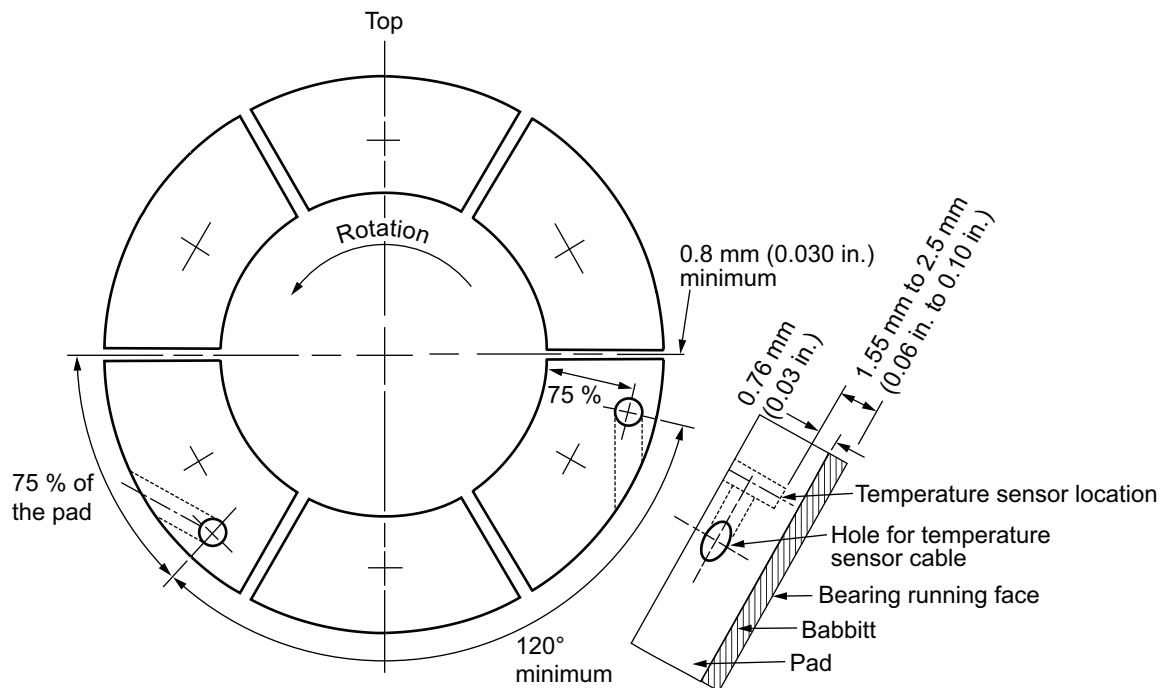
Typical Installation of Thrust Bearing Temperature Sensors
